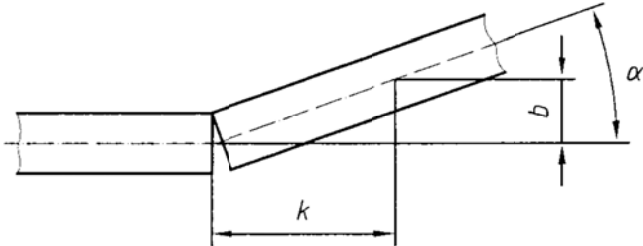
Contact fault in butt welding equipment (ISO 669)
